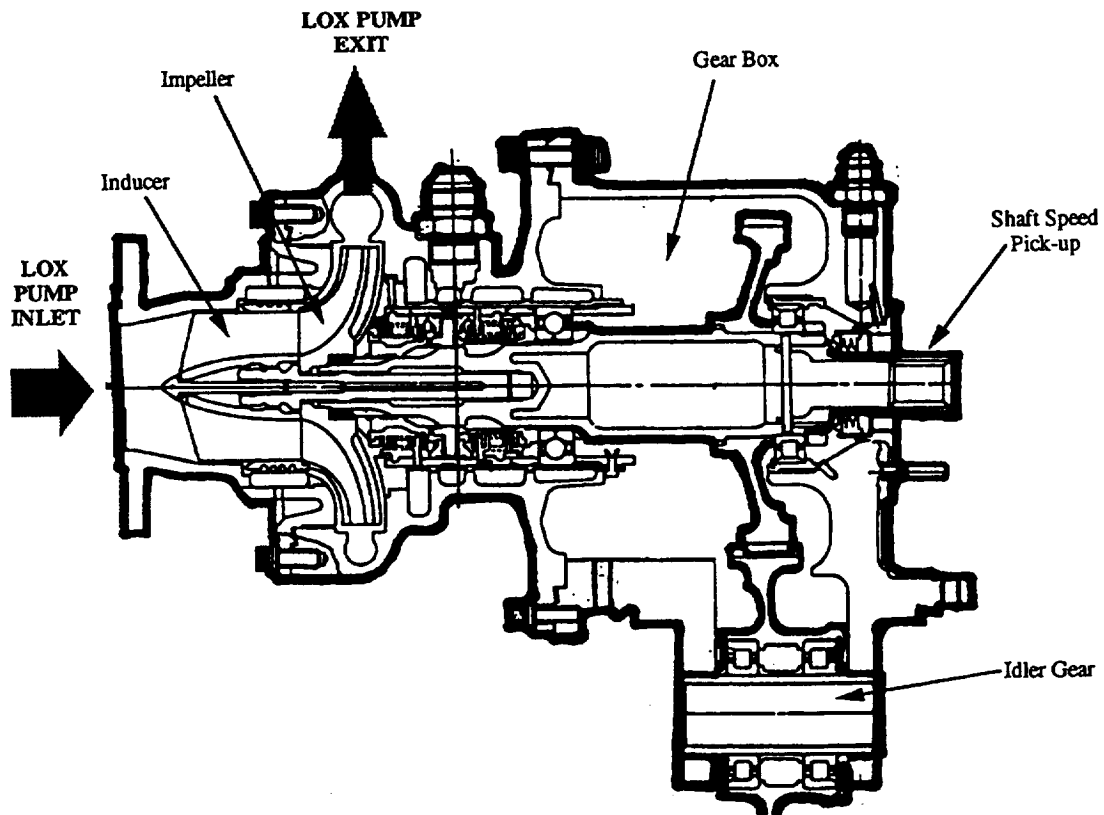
Cross Section of LOX Pump and GearBox
